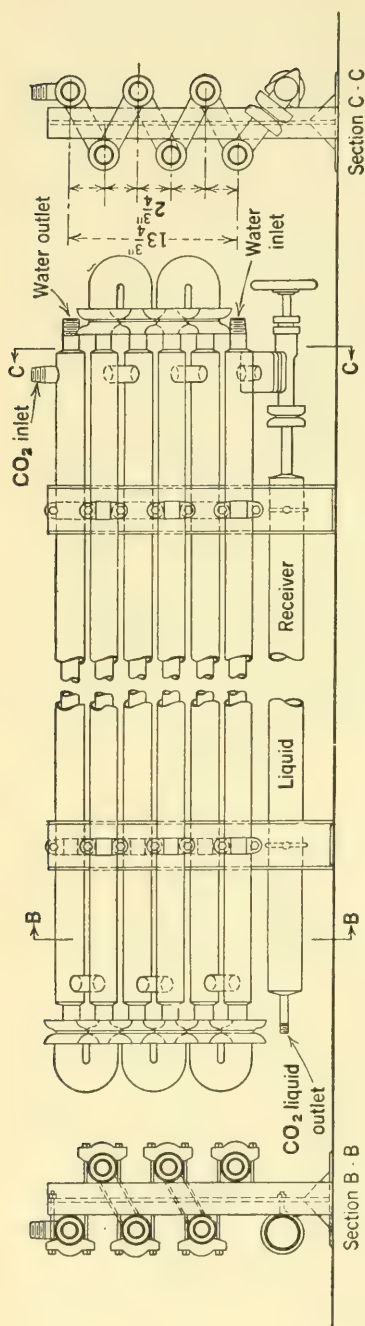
Double Pipe Welded CO₂ Condenser.
